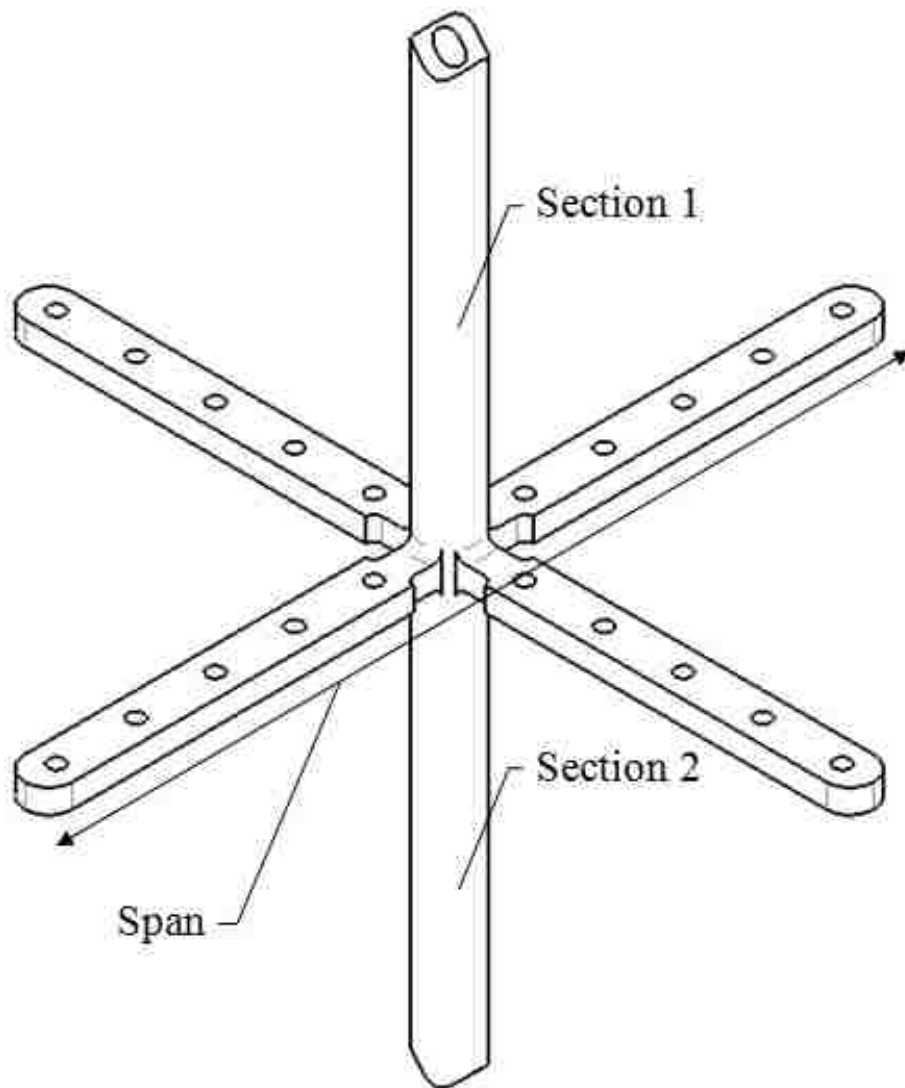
Isometric View. Example of Quad-Cantilevered Drain/Cantilever System composed of a Circular Drain and four Rectangular-shaped Cantilevers. An Example of the Second Drain/Cantilever System Type.
